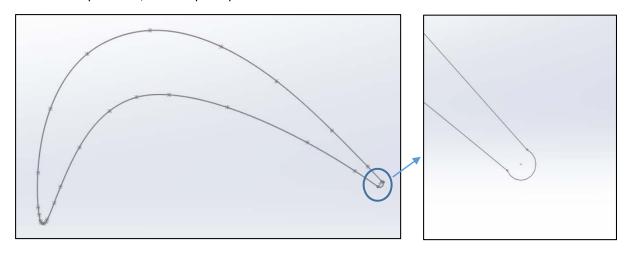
Solidworks sketch of rotor blade showing radius at trailing edge
